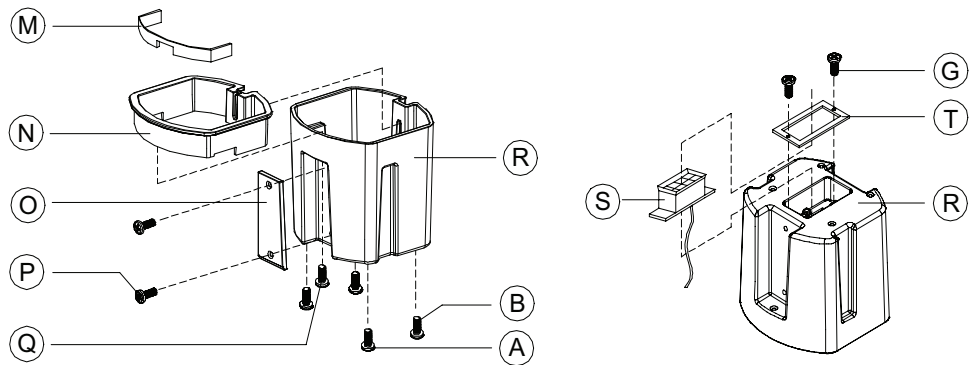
L1® Model II Line Array End Cap Assemblies Exploded View
